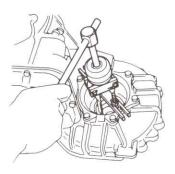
Using a puller to remove a differential bearing oil seal (Sec 10)
